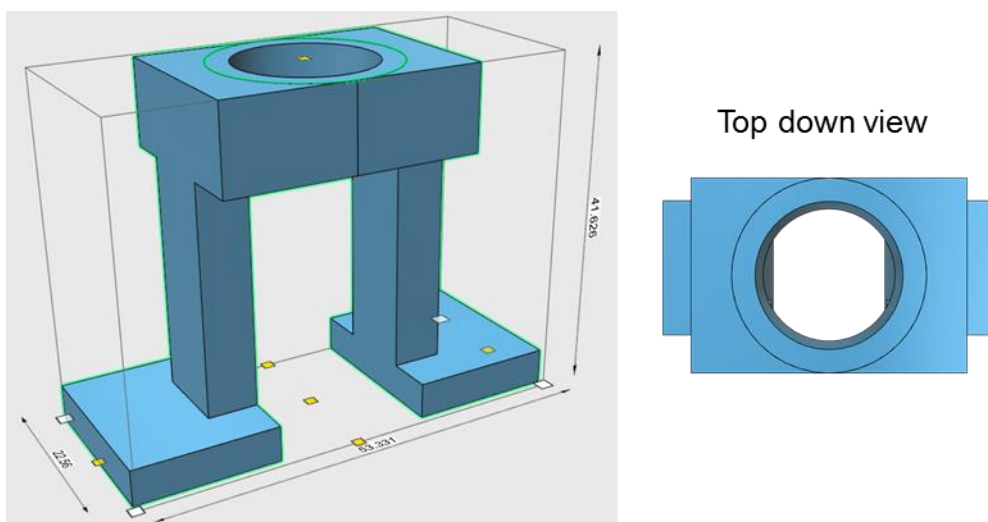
3D model used to print the glass tube holder and clamping flanges used to build the smaller scale reactor.
